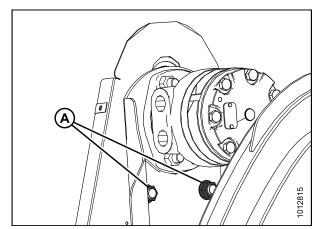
Single-Reel Drive Shown – Double Reel Similar
